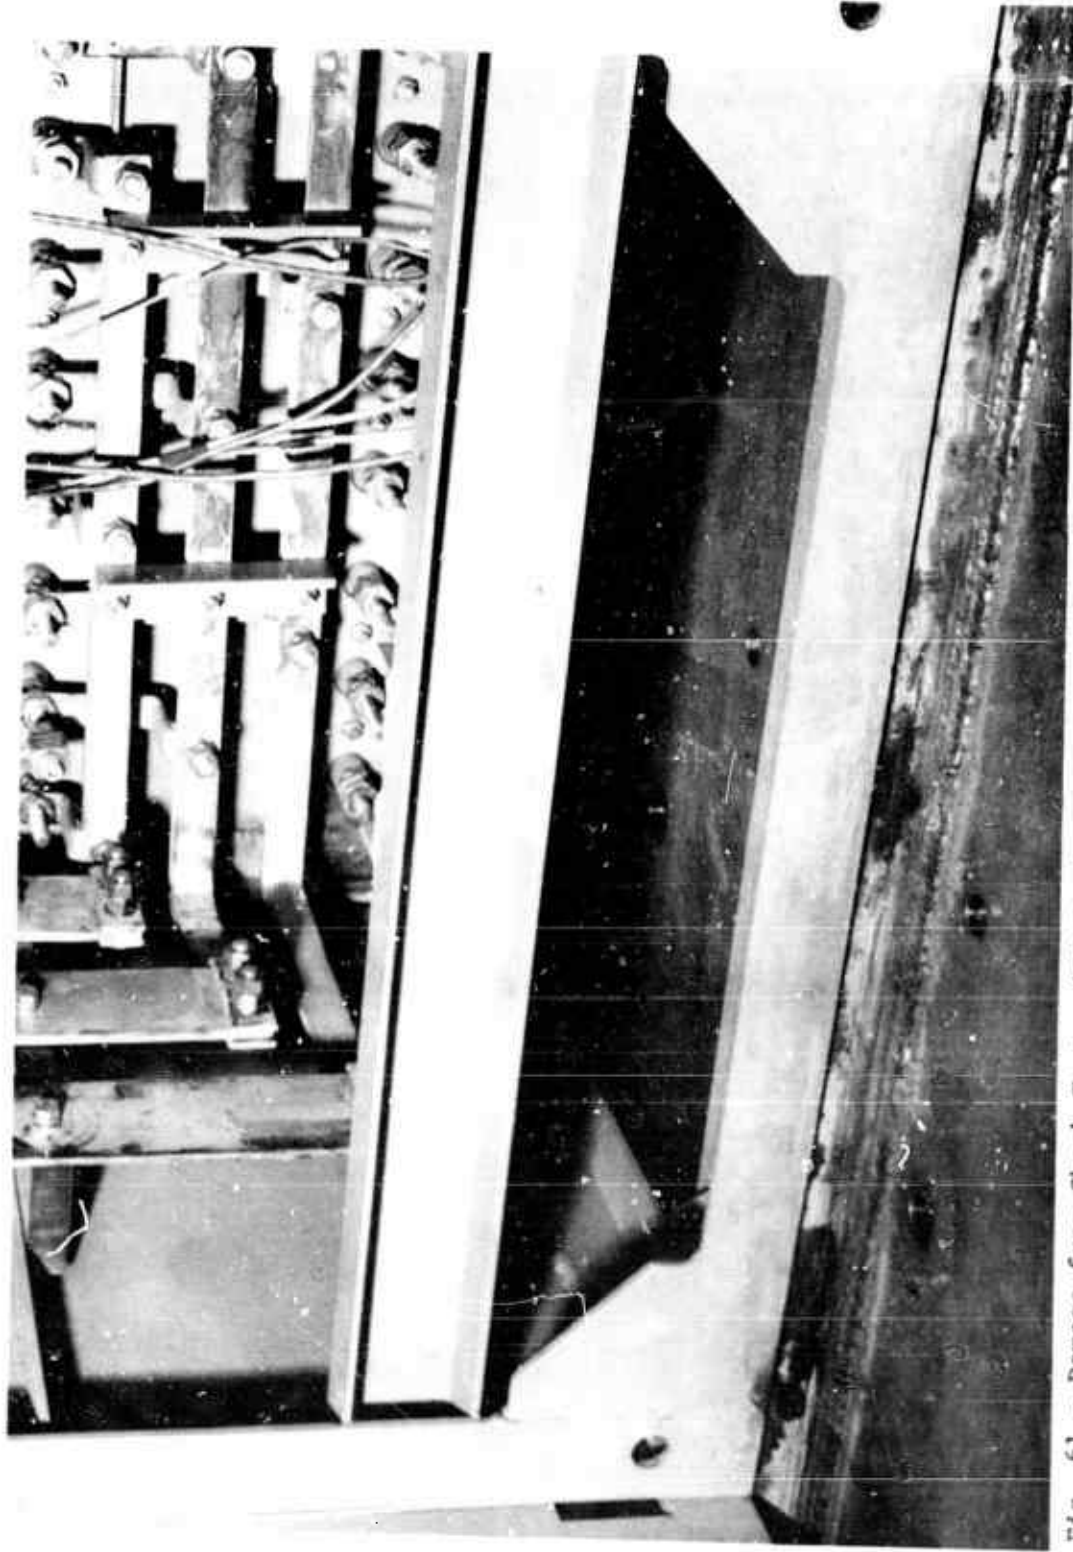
Damage from Shock Test - AQB Breaker Bay (Rear). Cracked welds in gussets at base of frame.
